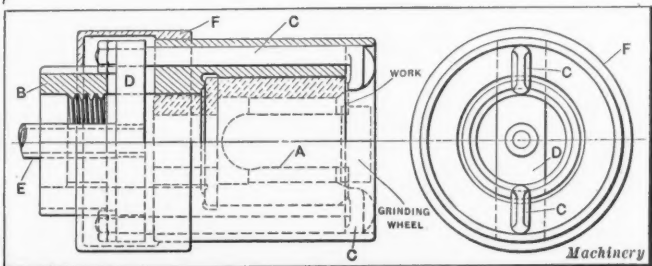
Satisfactory Device for holding a Main Drive Yoke that is easily sprung out of Shape
